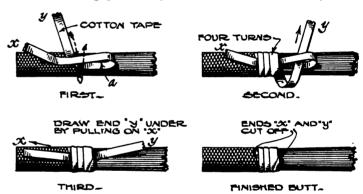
One method of butting or finishing the raw end of cable braiding preparatory to forming a cable.
